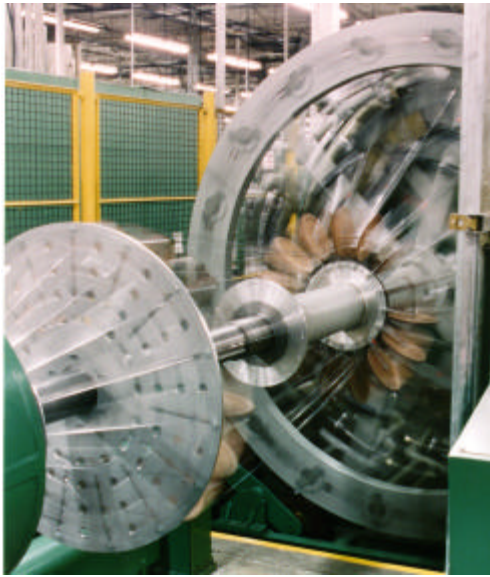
Cable conductor assembly being wound on a hollow flexible former using Bi-2223 OPIT/Ag wire tape similar to that shown in Fig. 12. Photo courtesy of Pirelli Cable USA.
